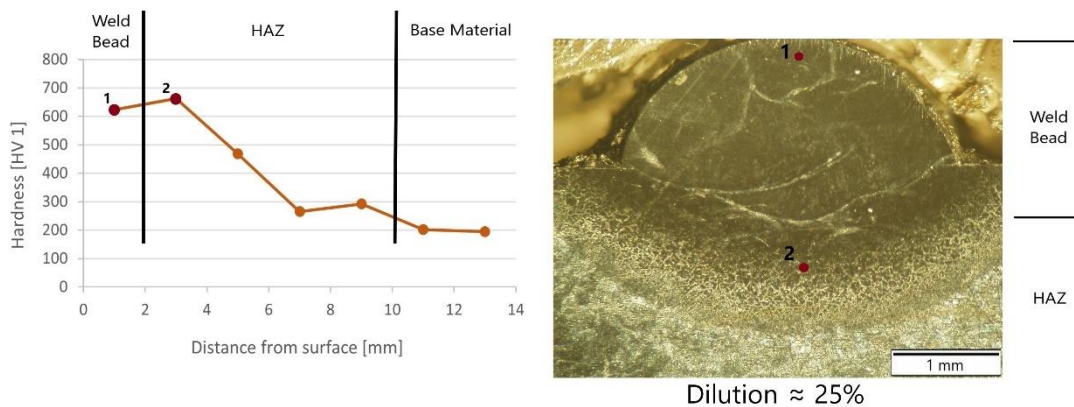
Welding Current: 70A; Welding Speed: 100mm/min; Powder Feed Rate: 10.4g/min (1)
